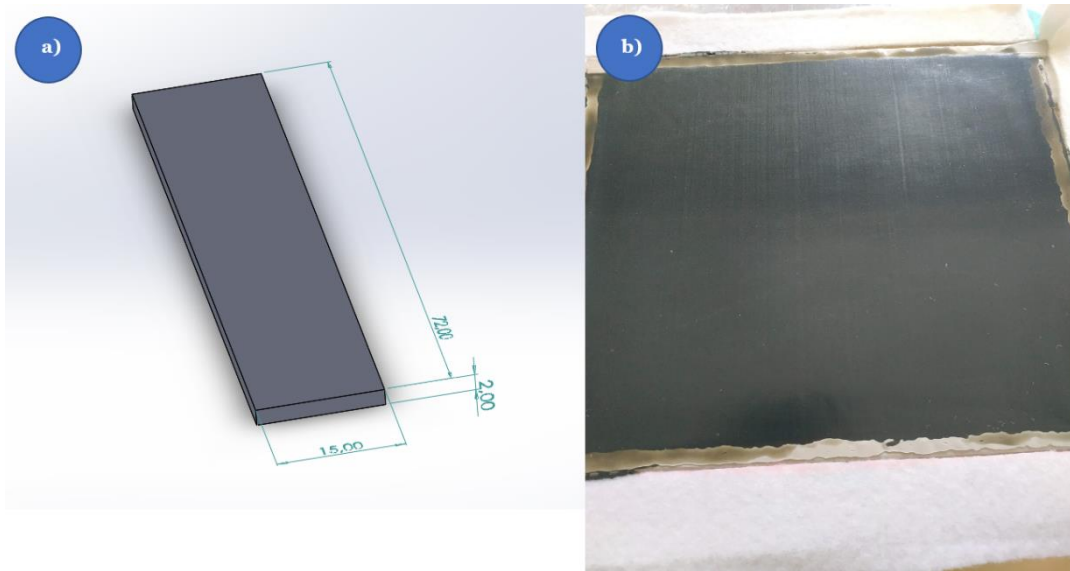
Bulk adhesive: a) Specimen's dimensions; b) Laminate.
